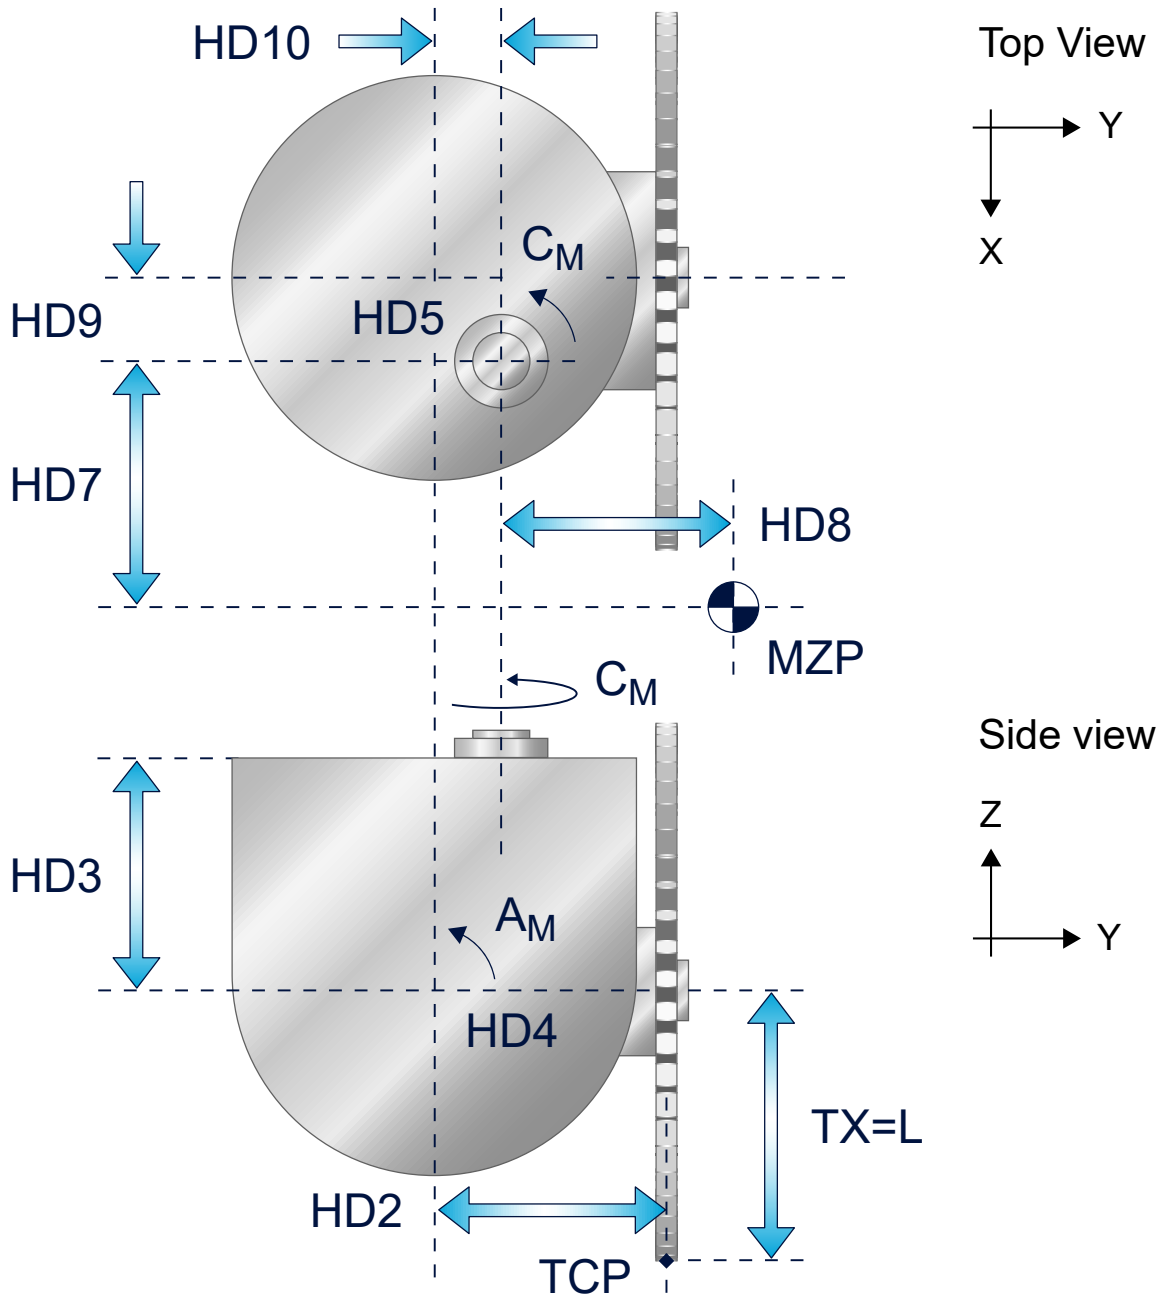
5-axis sawing tool (zero position where HD5 = 0, HD4 = +90, CM=0)
